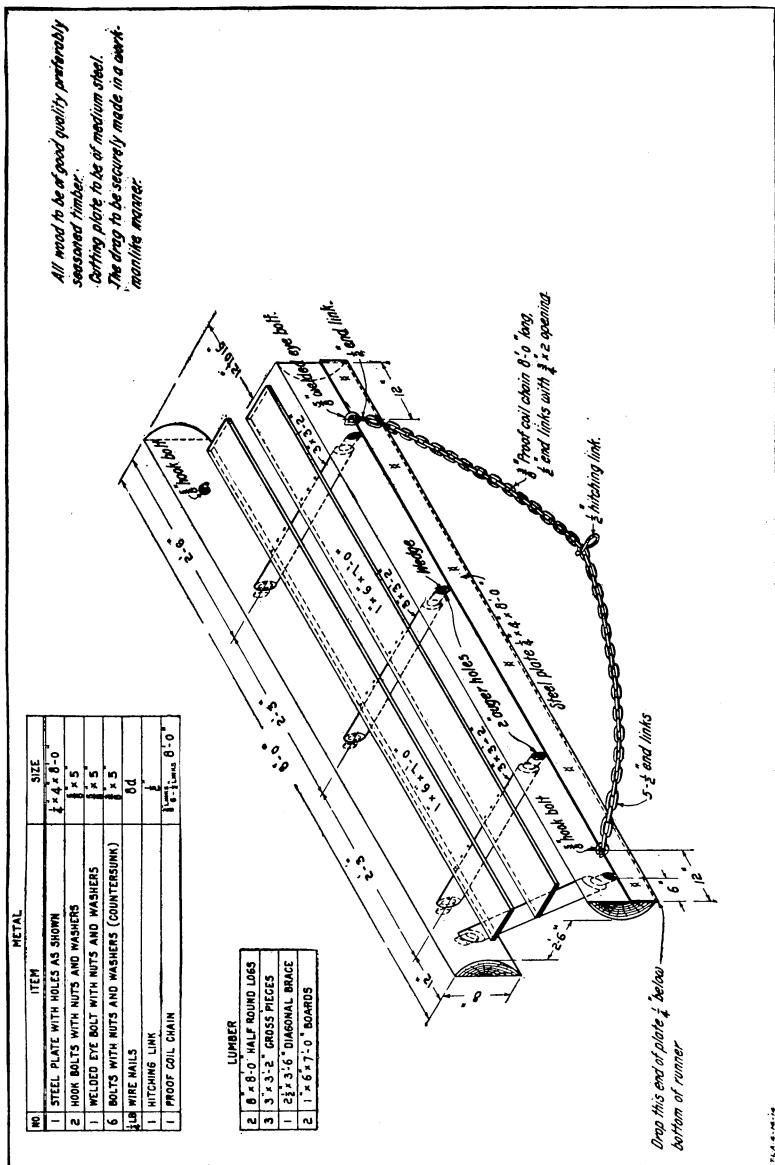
Detail drawing showing typical construction of split-log road drag.
